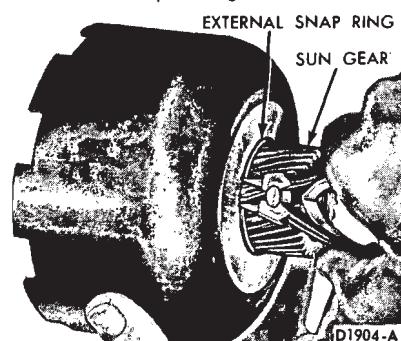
Removing or Installing Sun Gear External Snap Ring
